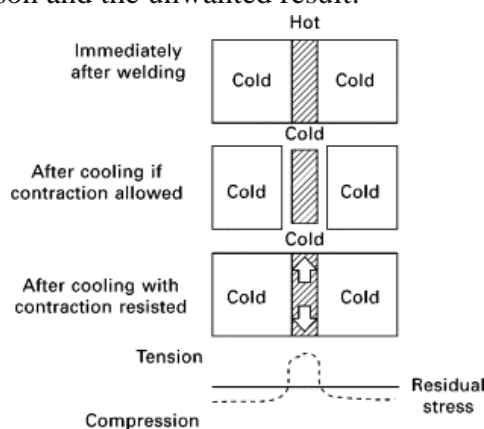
Formation of residual stresses due to welding [6]
